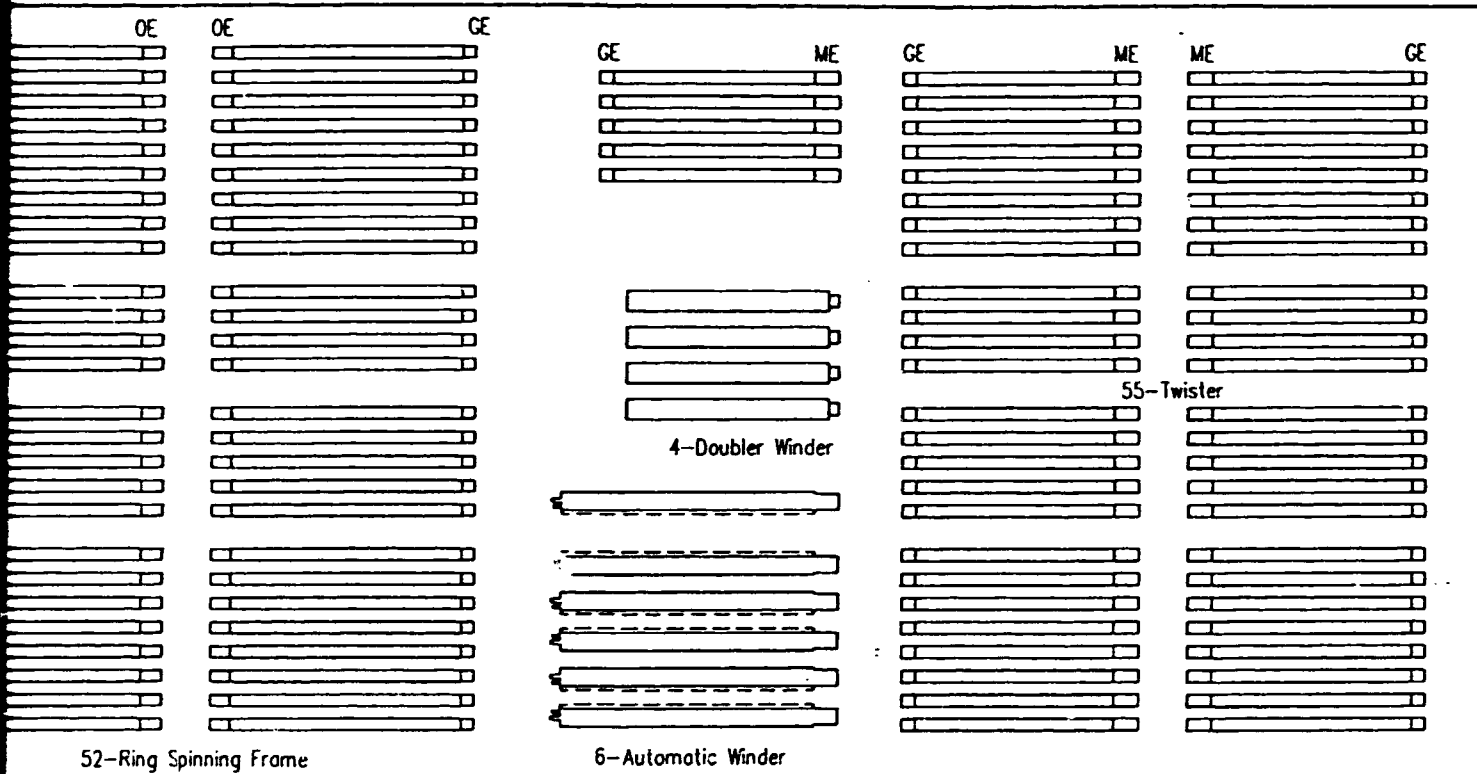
LAYOUT OF PRODUCTION MACHINERY
